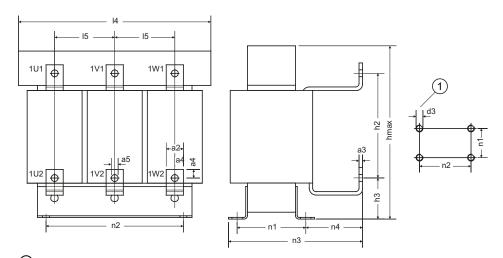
Dimension drawing of line reactor, frame size FSF
